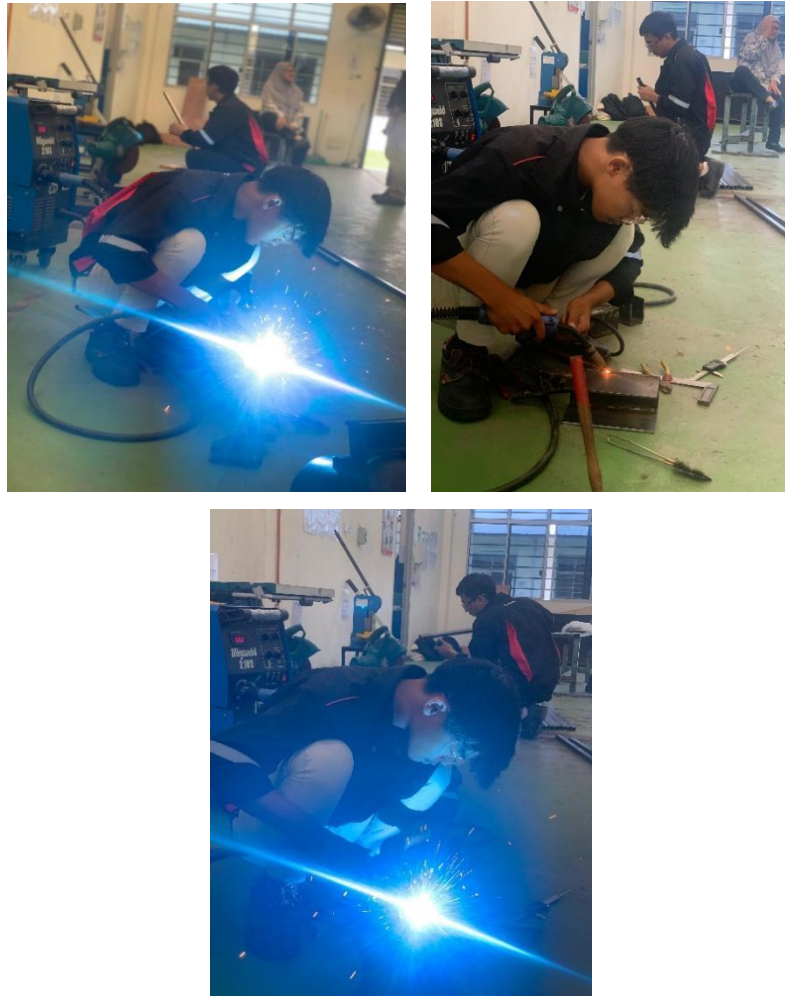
Central Frame Components Were Welded Together To Form The Main Body Of The Automatic Vice
